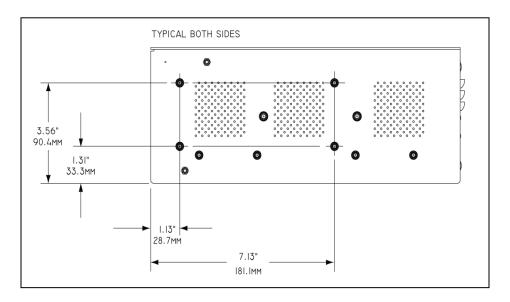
ADH SIROCCO RACK MOUNT HOLE DIMENSIONS.
